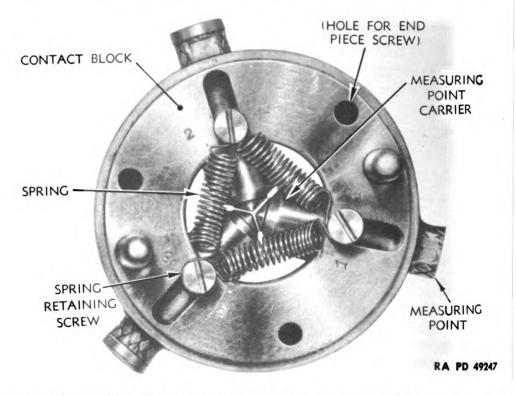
End View of Contact Block with Cap and End Piece Removed (3-point Cylinder Gage for 37-mm Guns)
